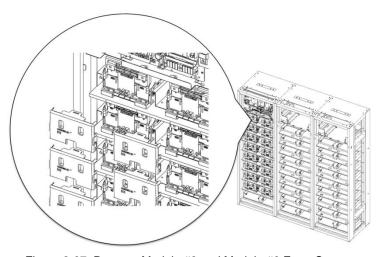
Remove Module #8 and Module #9 Front Cover
